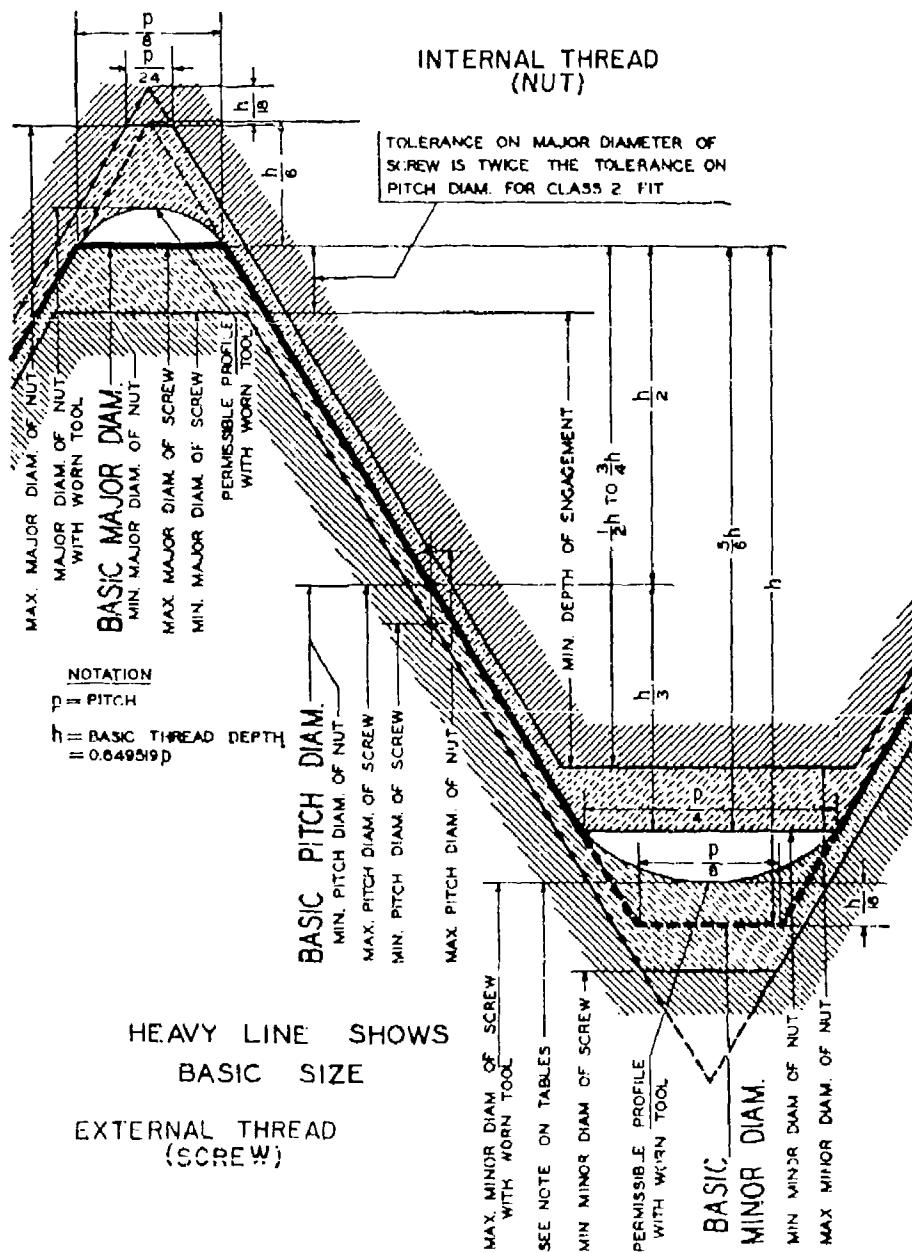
Disposition of tolerances and crest clearances for class 3.
